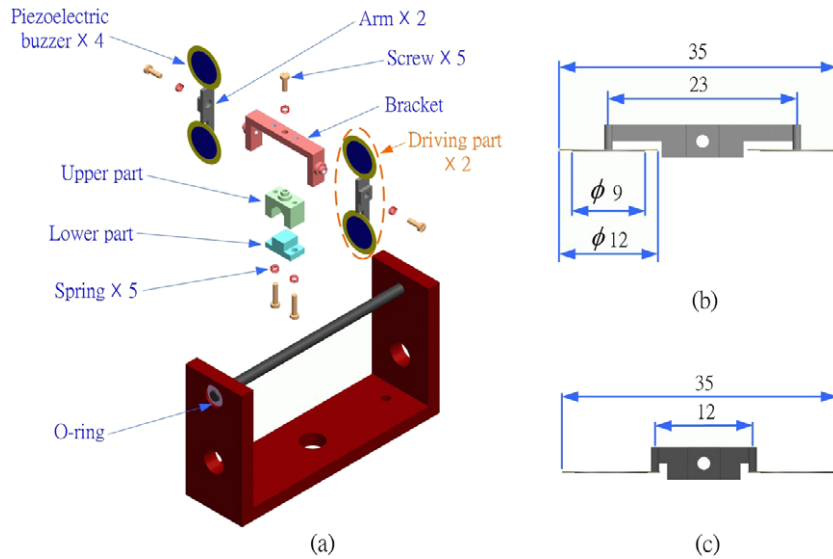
Exploded view of a 3-DOF piezoelectric actuator and the dimensions of the driving part: (a) exploded view; (b) driving part dimensions in mm of the type-A actuator; and (c) driving part dimensions in mm of the type-B actuator.
